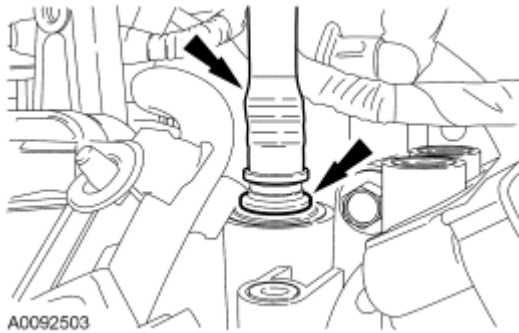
Locating Power Brake Booster Vacuum Tube And Quick Release Locking Ring
